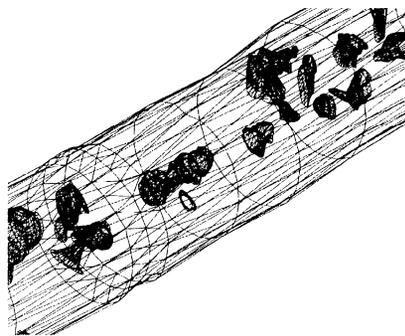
Zoomed-in view of a section of the wire-frame image.
